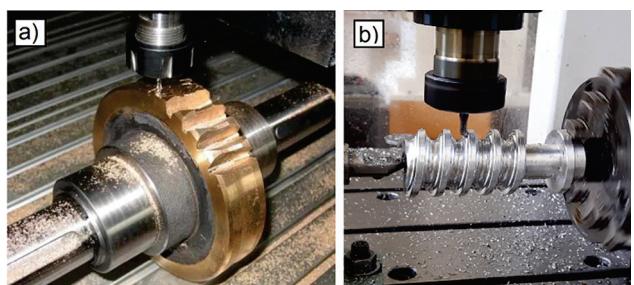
Step-by-step machining of a) worm wheel, b) a worm
